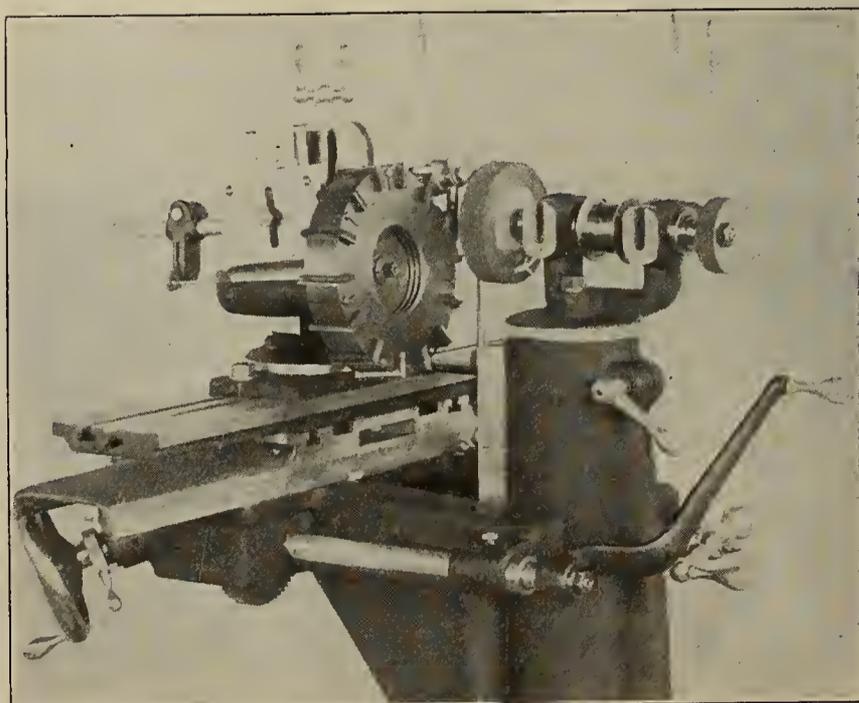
SHOWING A TOOTH MILLING CUTTER.
